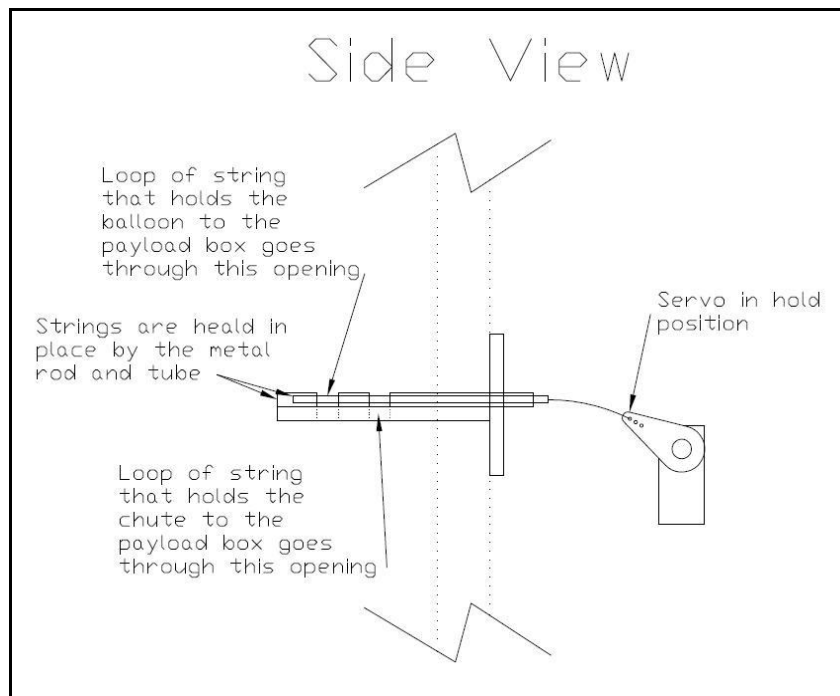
Release Mechanism Shown in Initial, Hold, Position
